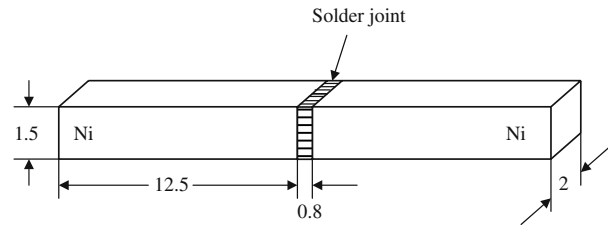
Dimensions of the tensile testing specimen used in the current work. The dimensions are in millimeters.
